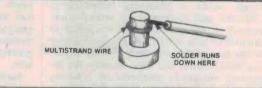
'Wicking' is caused by solder running back up the strands of multi-strand hookup wire. This makes the wire brittle at the joint and movement may break it.
